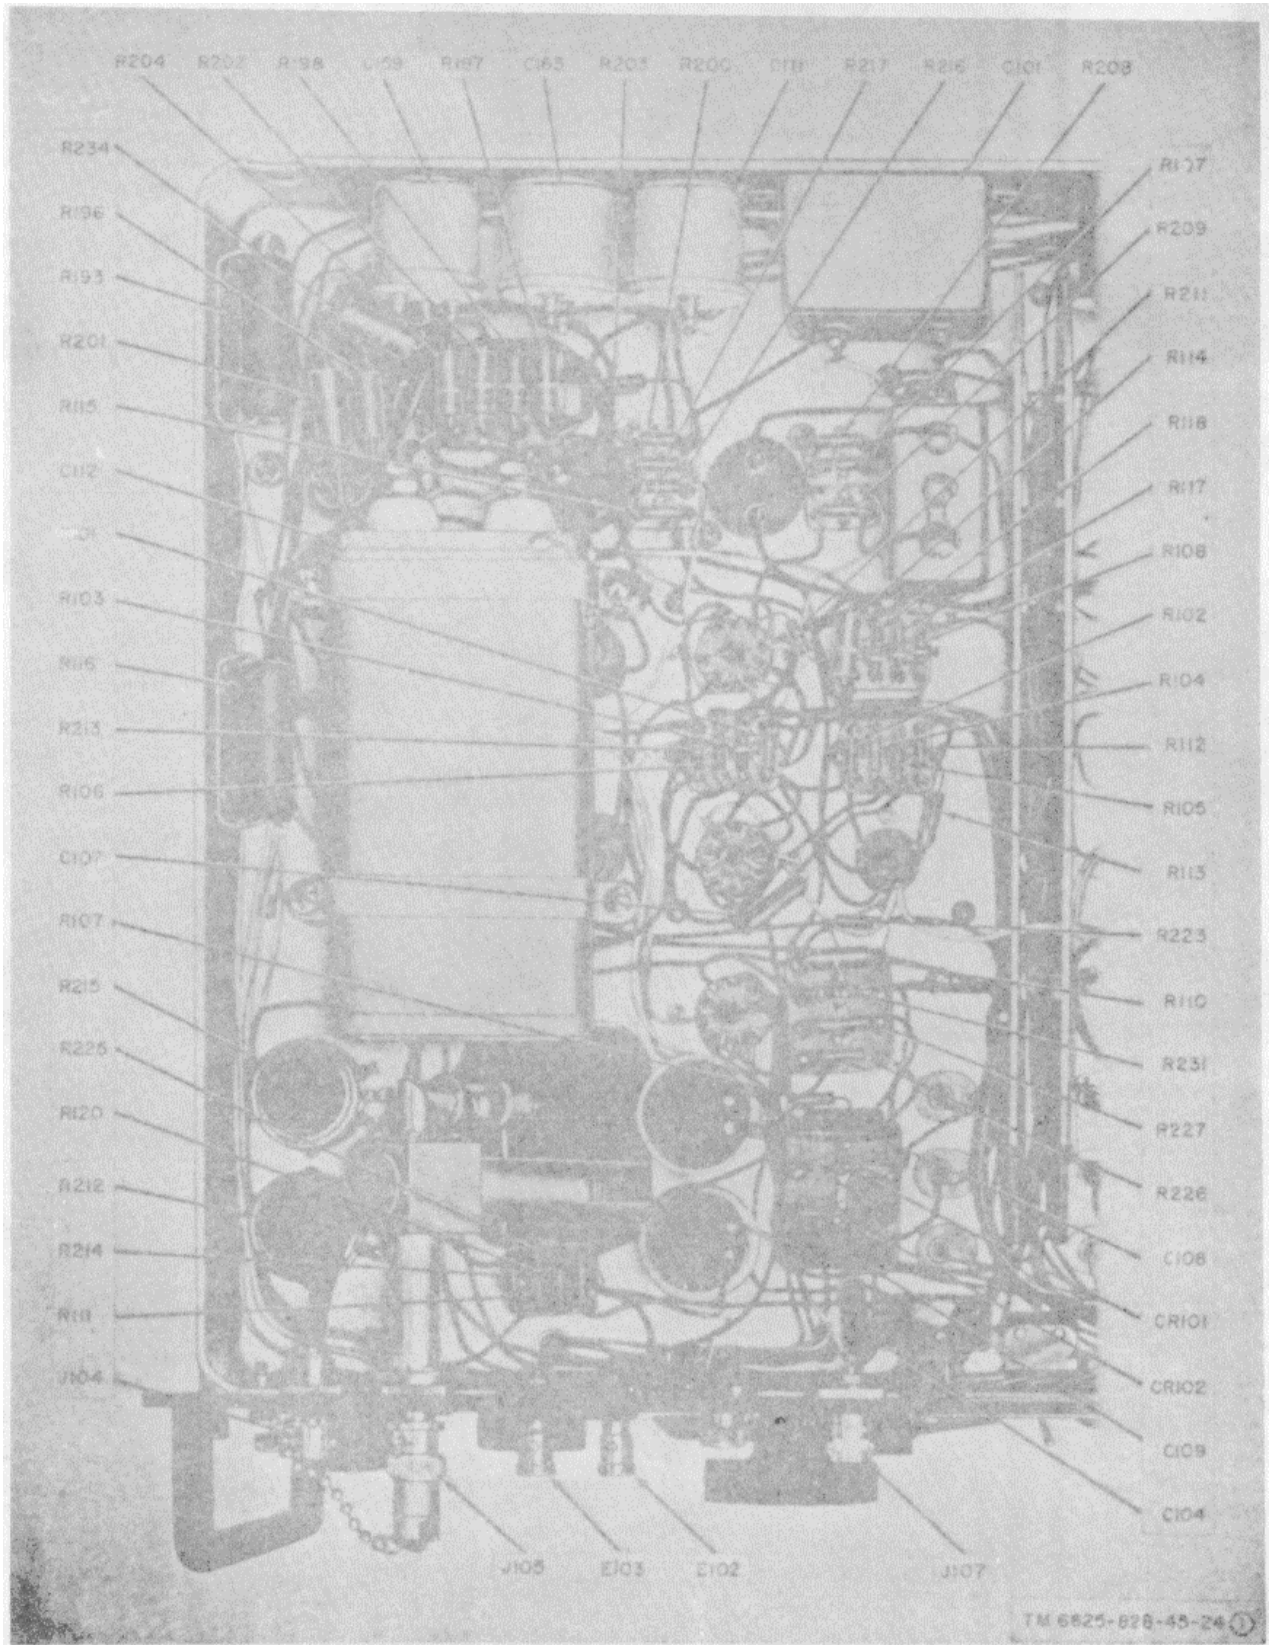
(1). Test set chassis, bottom view (part 1 of 2)
